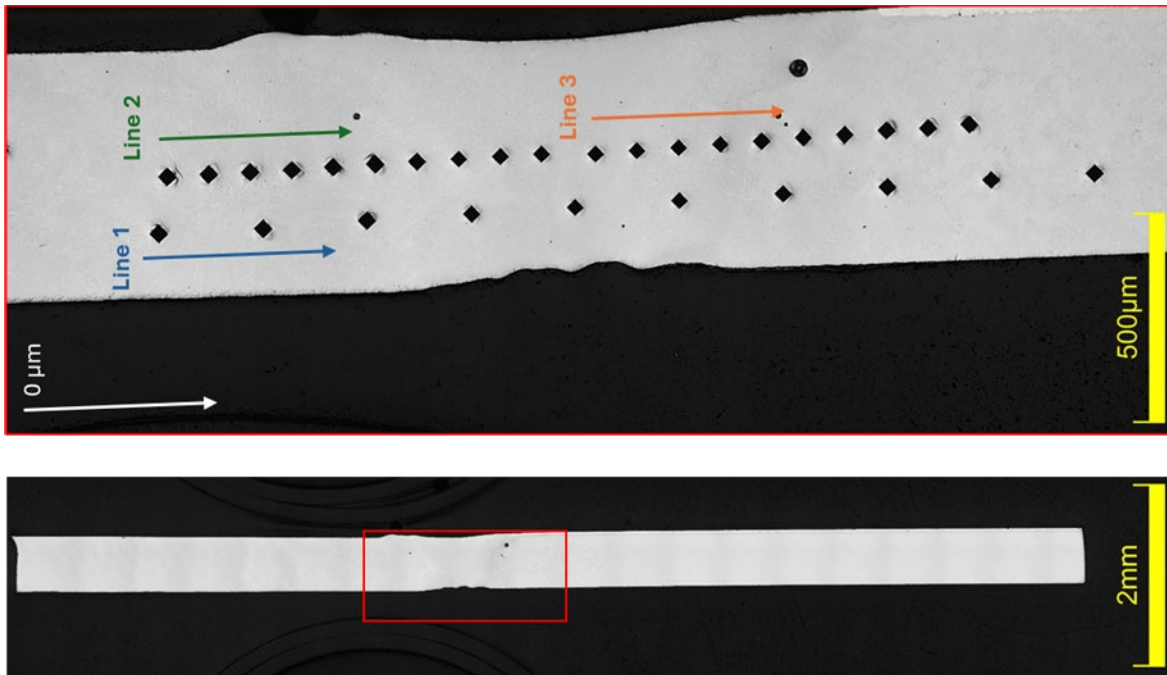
Weld hardness profile example measurement scheme for MI-Z-L1-3 S2.
